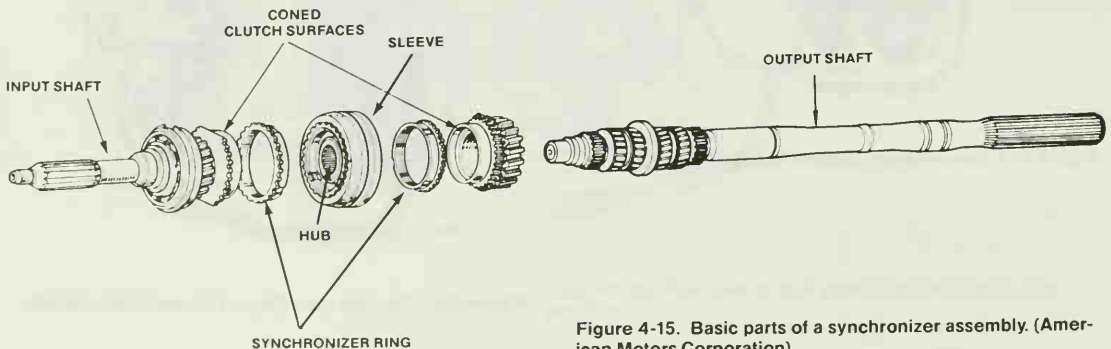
Basic parts of a synchronizer assembly. (American Motors Corporation)
